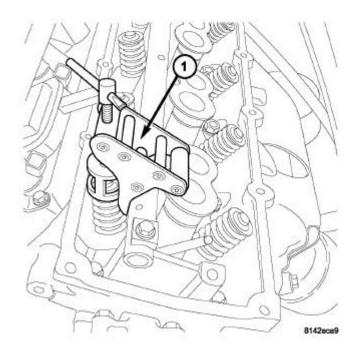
VALVE SPRING REMOVAL/INSTALLATION EXHAUST Courtesy of CHRYSLER LLC
